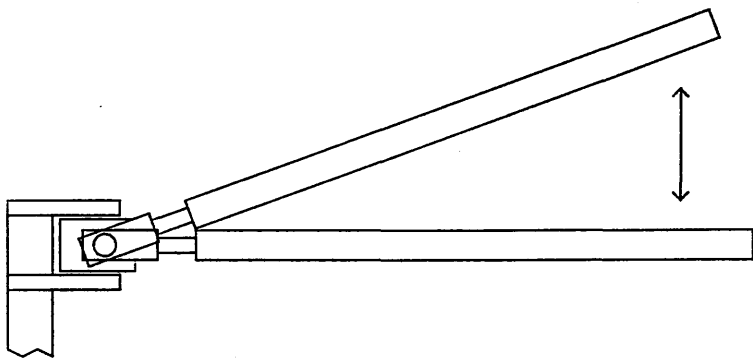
ROTOR BLADE FLAPPING ABOUT A HINGE
